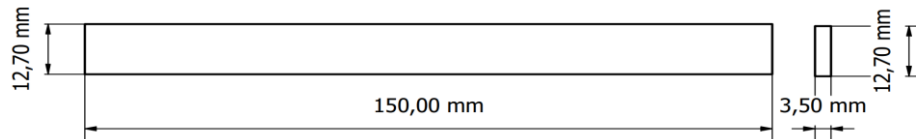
Dimensions of Bending Test Specimens Designed Based on ASTM D790.
